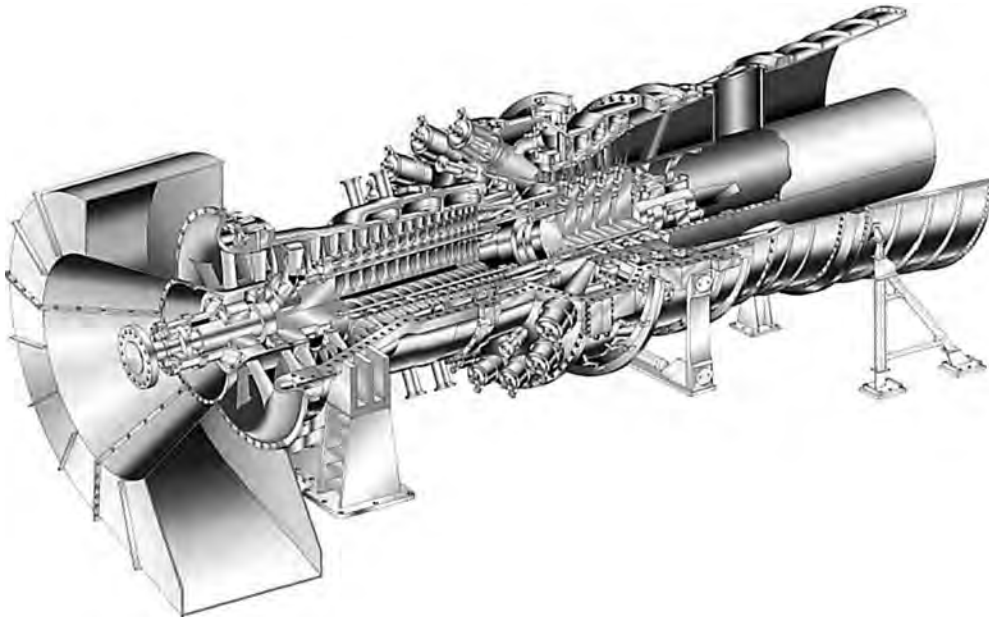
Cutaway view of M701 large heavy-duty industrial design. (Courtesy Mitsubishi Heavy Industries.)
